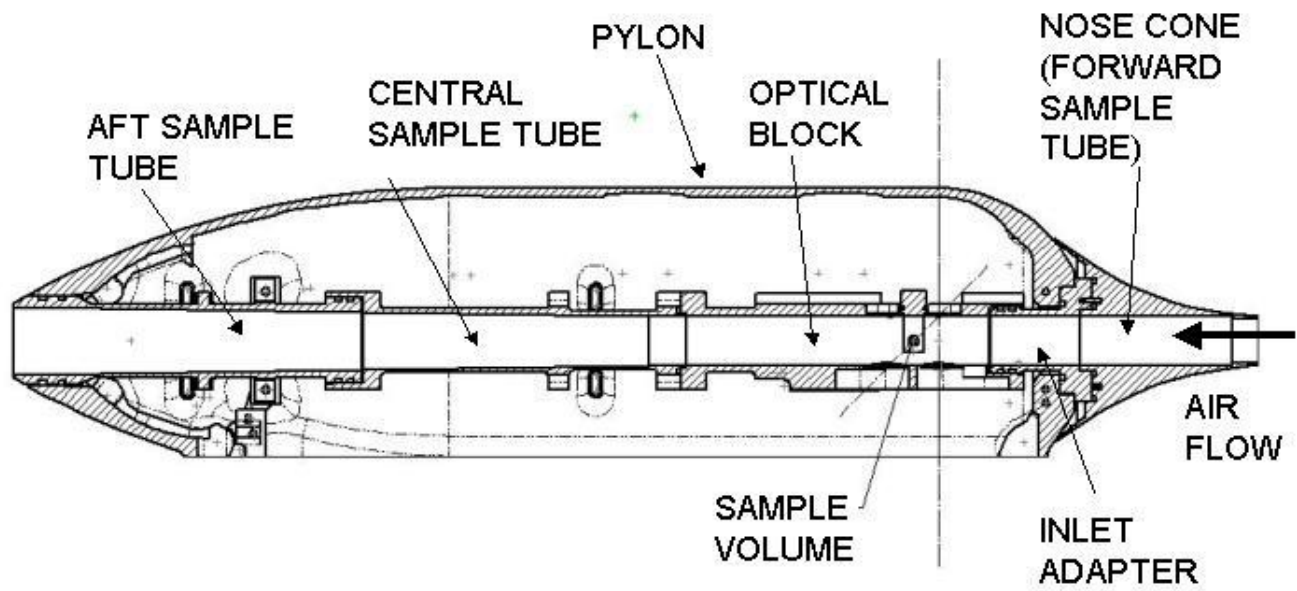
Cutaway view of CPI Sample Tube showing relevant components.
